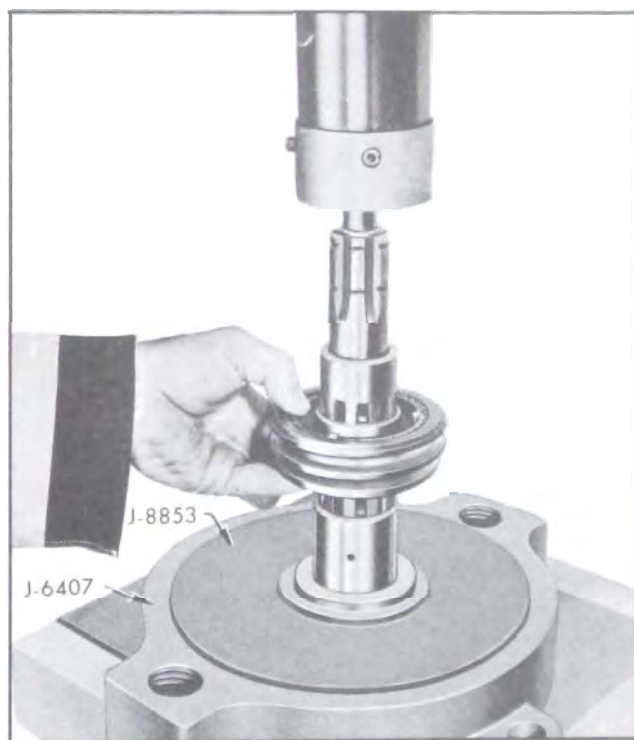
Installing First Speed Gear Bushing Using J-8853
